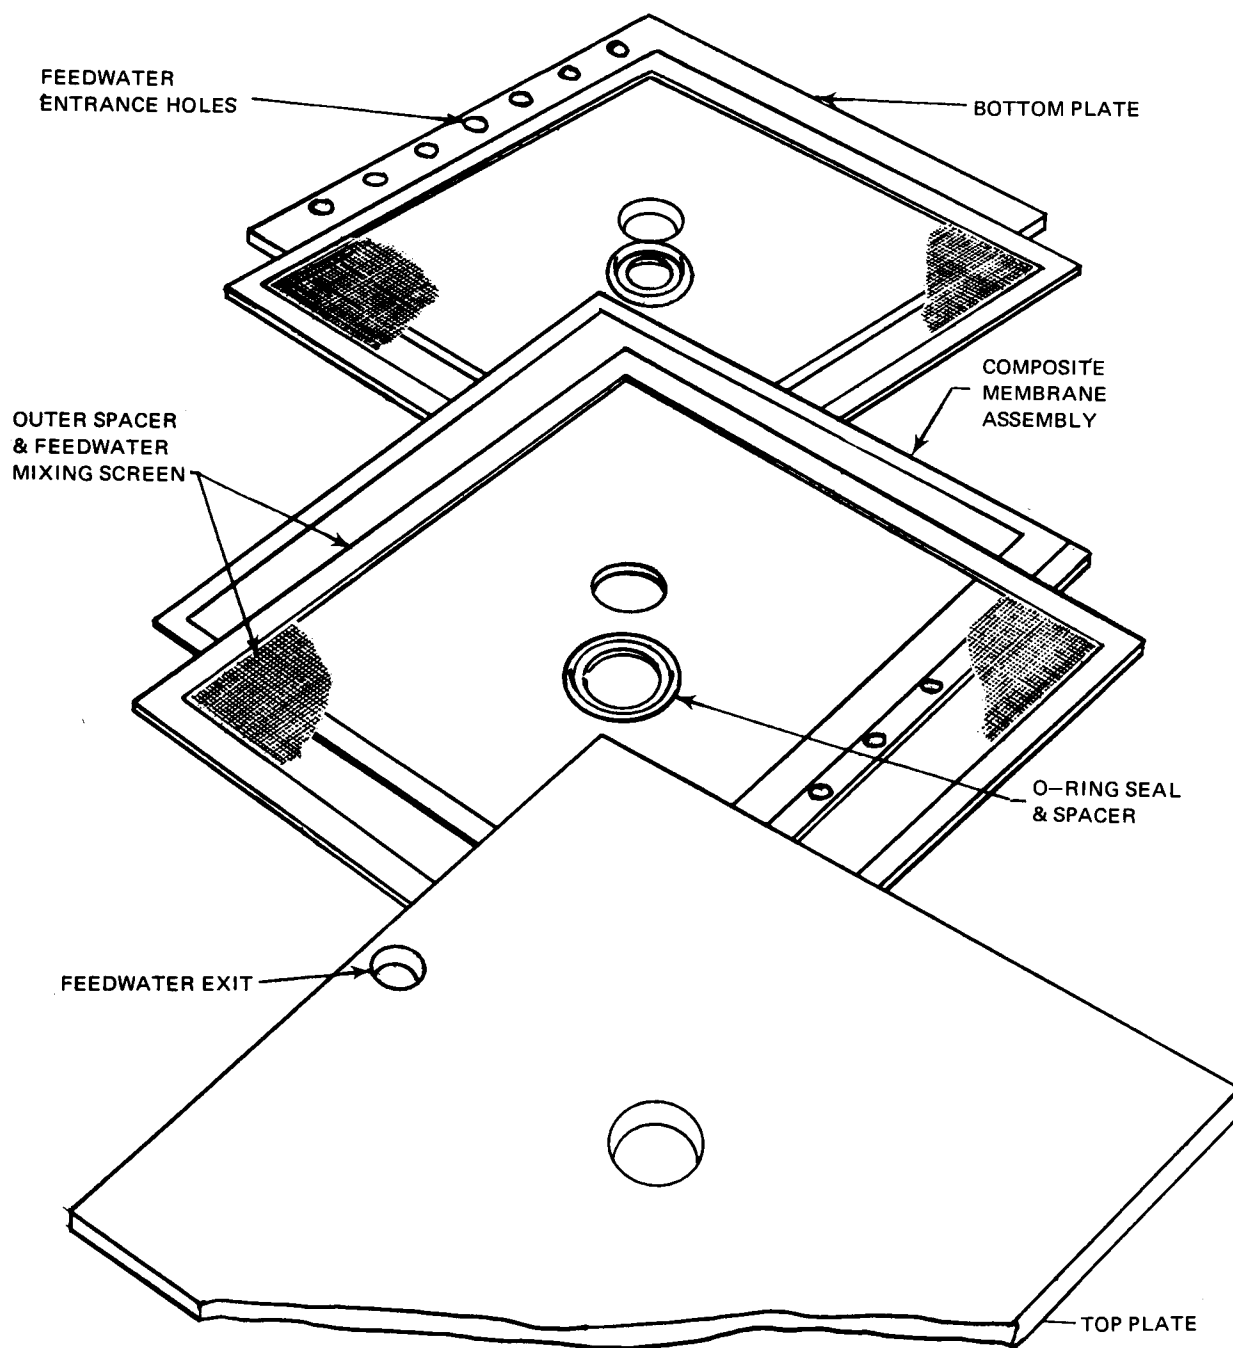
Exploded View of Reverse-Osmosis Cartridge
